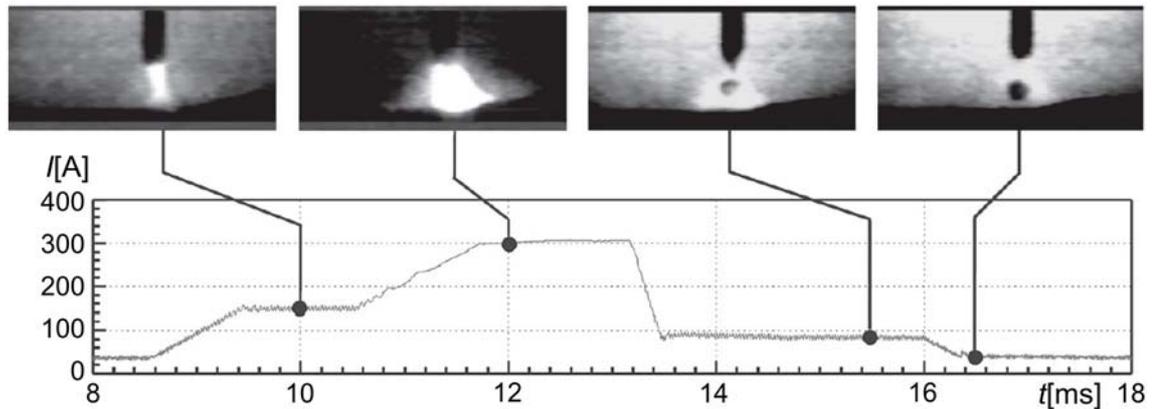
Pulsed arc welding – Single Pulse [4]
